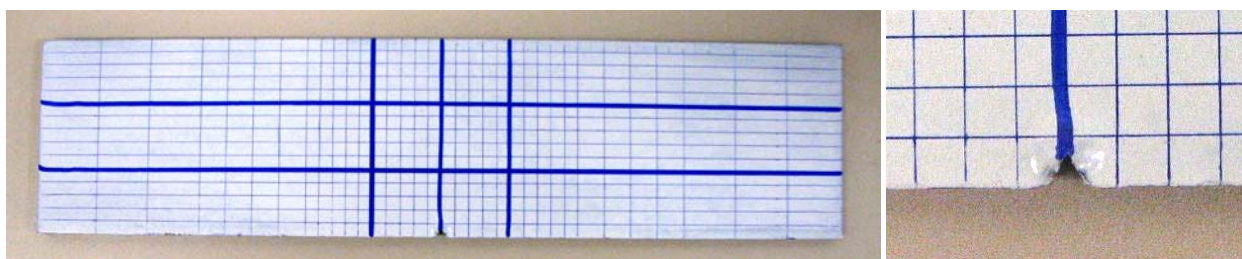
DWTT test specimen and detail of the pressed V-notch.
